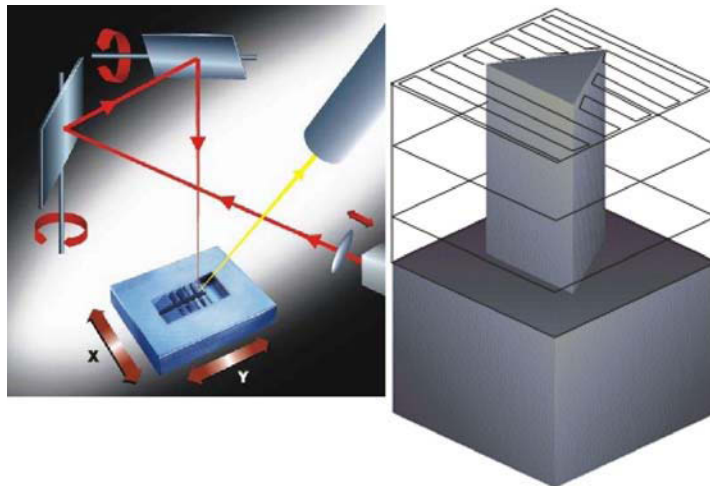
Principle of 3D laser machining by laser scribing technology.
